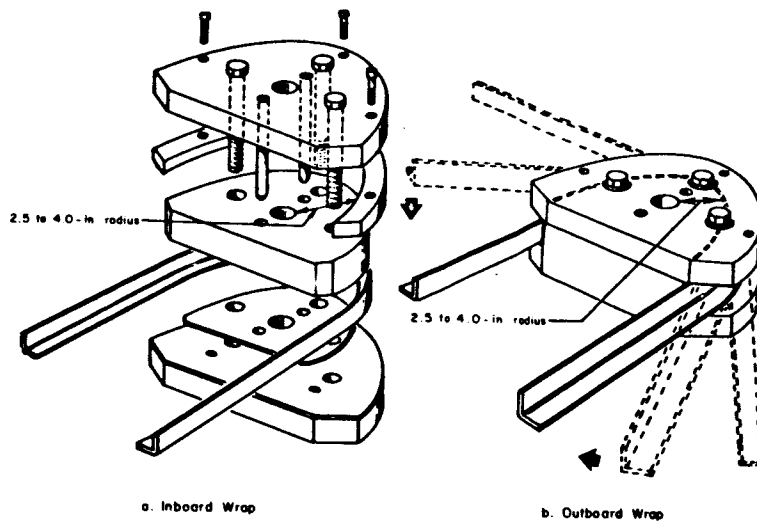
STRETCH-MACHINE (ANGLE SECTIONS) TOOLS
